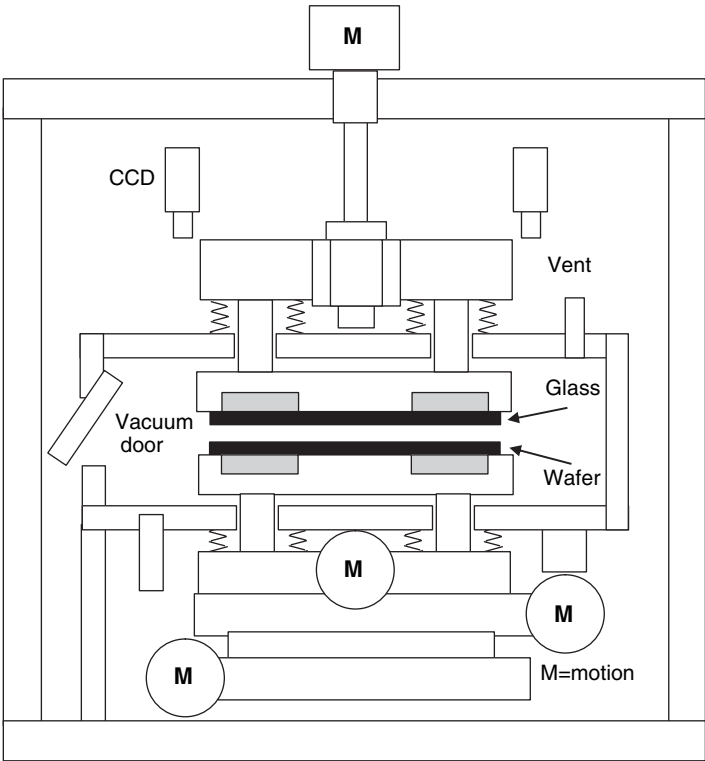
Vacuum chamber and assembly platform. Reprinted courtesy of Society for Information Display
